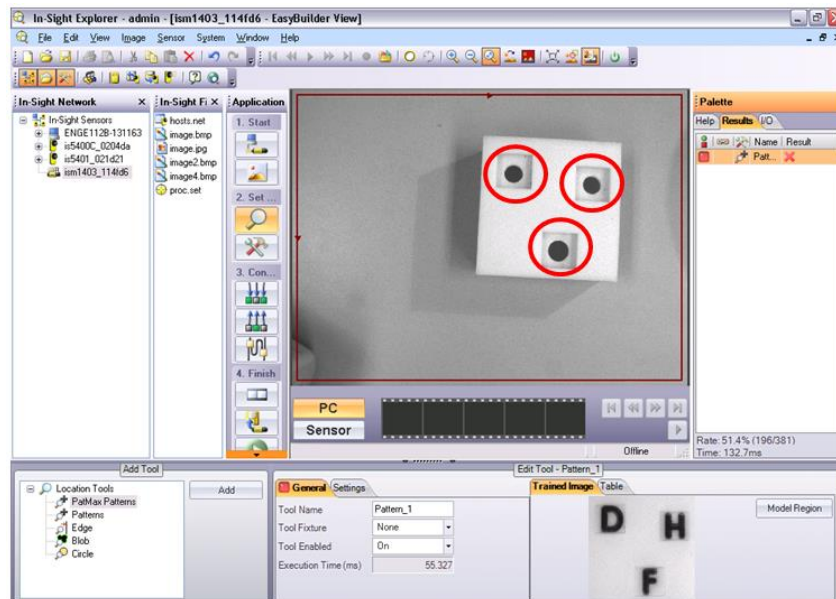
Machine Vizion System Defective New Assembly Base using PatMax Pattern (Missing All Components)
